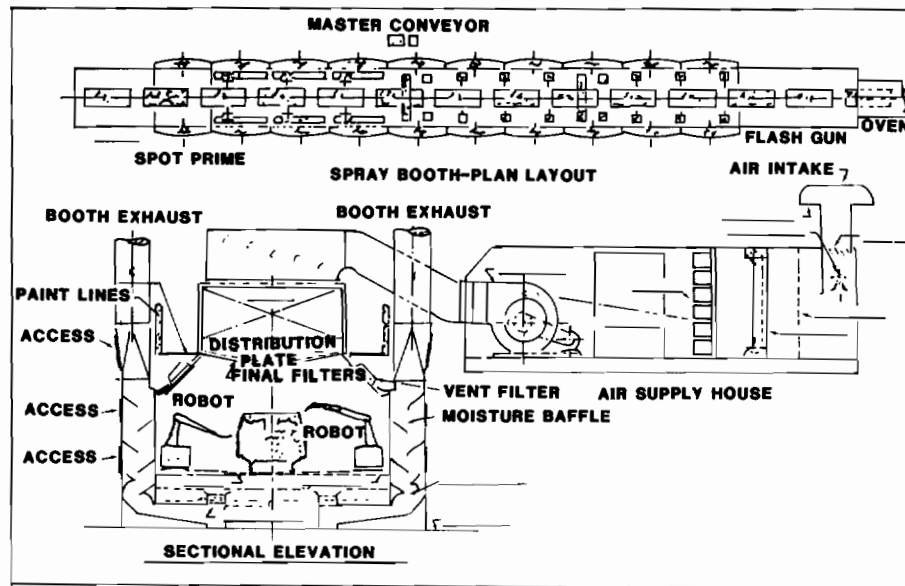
A spray-painting booth layout. (Courtesy of Joseph F. Engelberger.)
